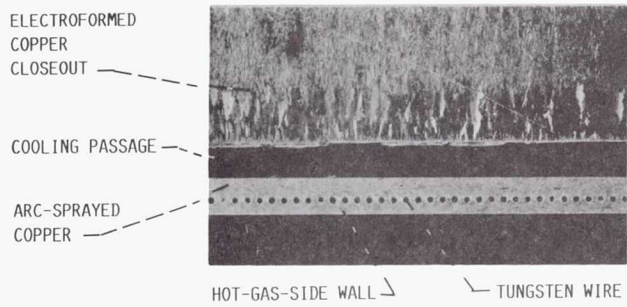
LONGITUDINAL SECTION OF CHAMBER LINER SHOWING TUNGSTEN WIRE REINFORCEMENT.
